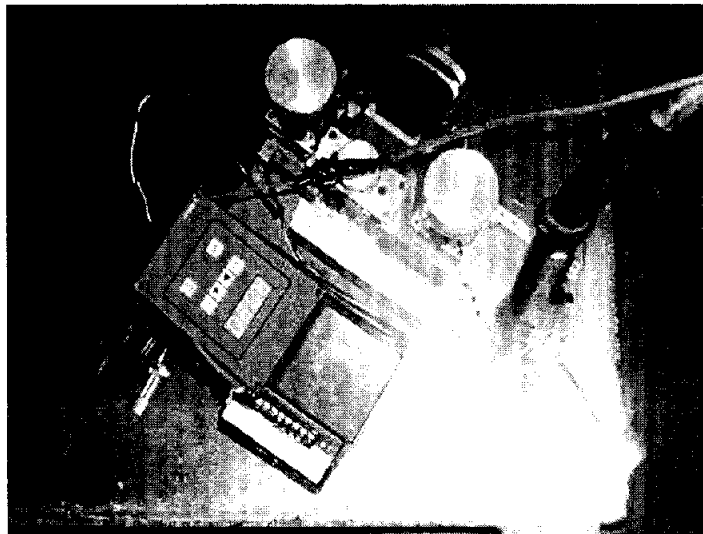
Photograph of the developed welding mobile robot
